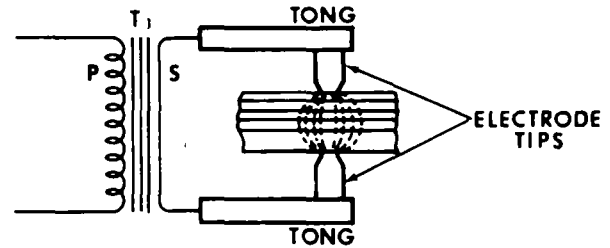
3. Resistance Spot Weld Heat Zones
